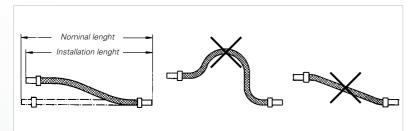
Correct (left), too big (middle) and too small nominal length (right) of a hose assembly for correcting a misalignment.
